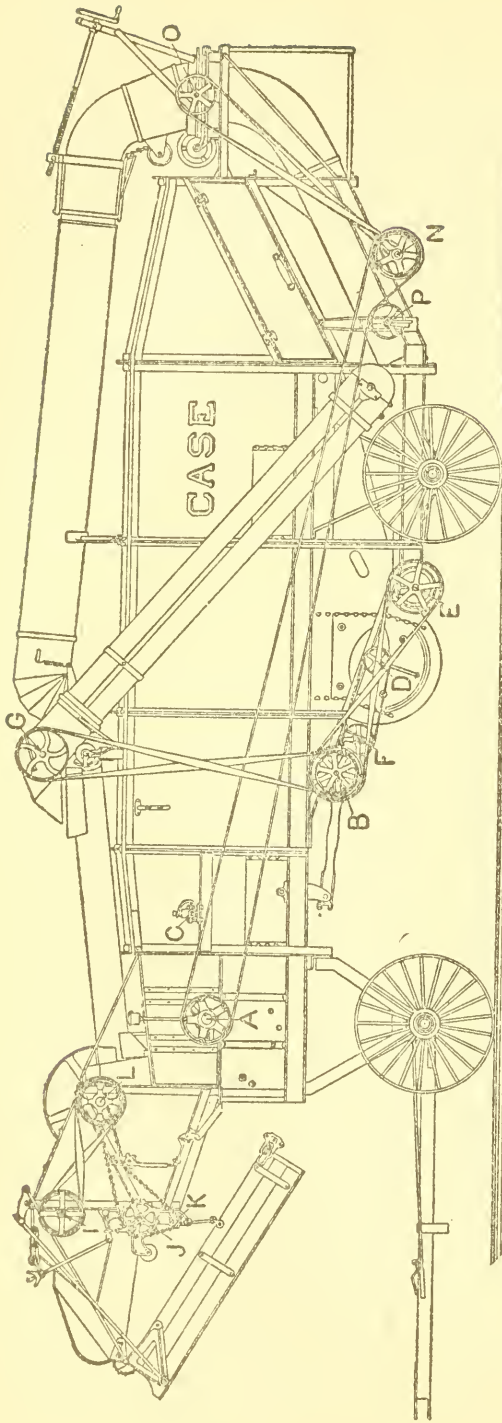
RIGHT SIDE OF BELT SEPARATOR WITH FEEDER AND WIND STACKER.
